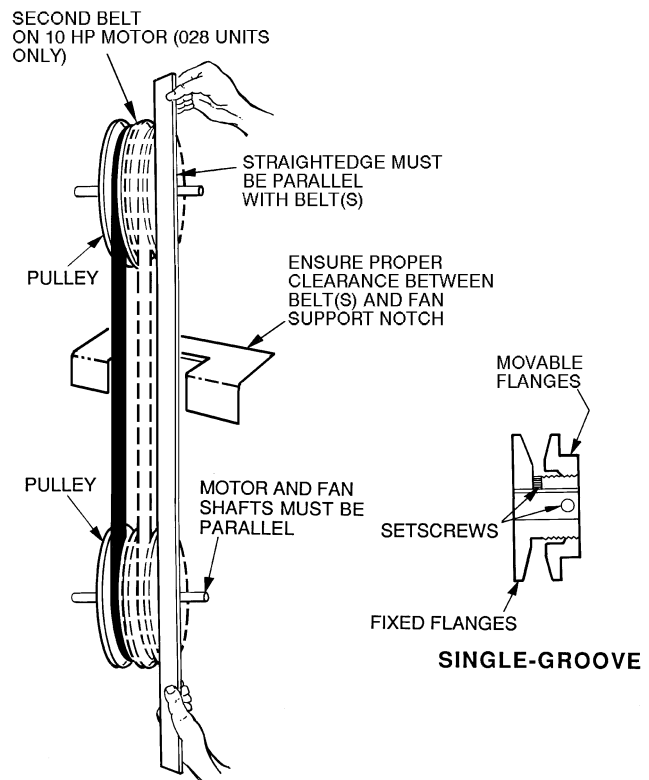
Evaporator-Fan Pulley Alignment and Adjustment
